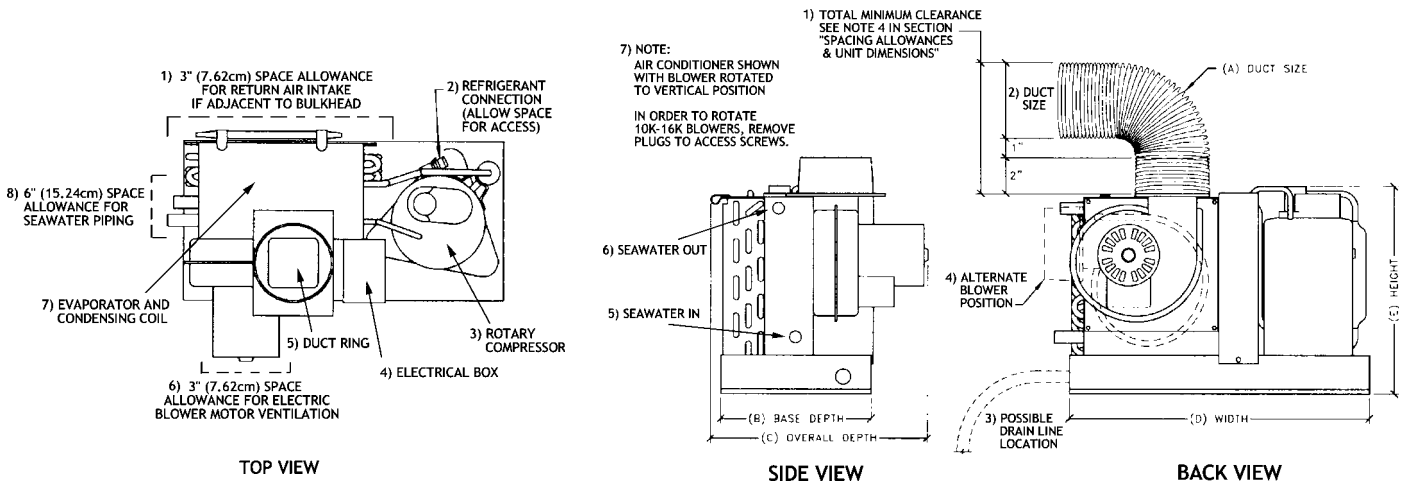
Spacing Allowances & Unit Dimensions for Mounting
